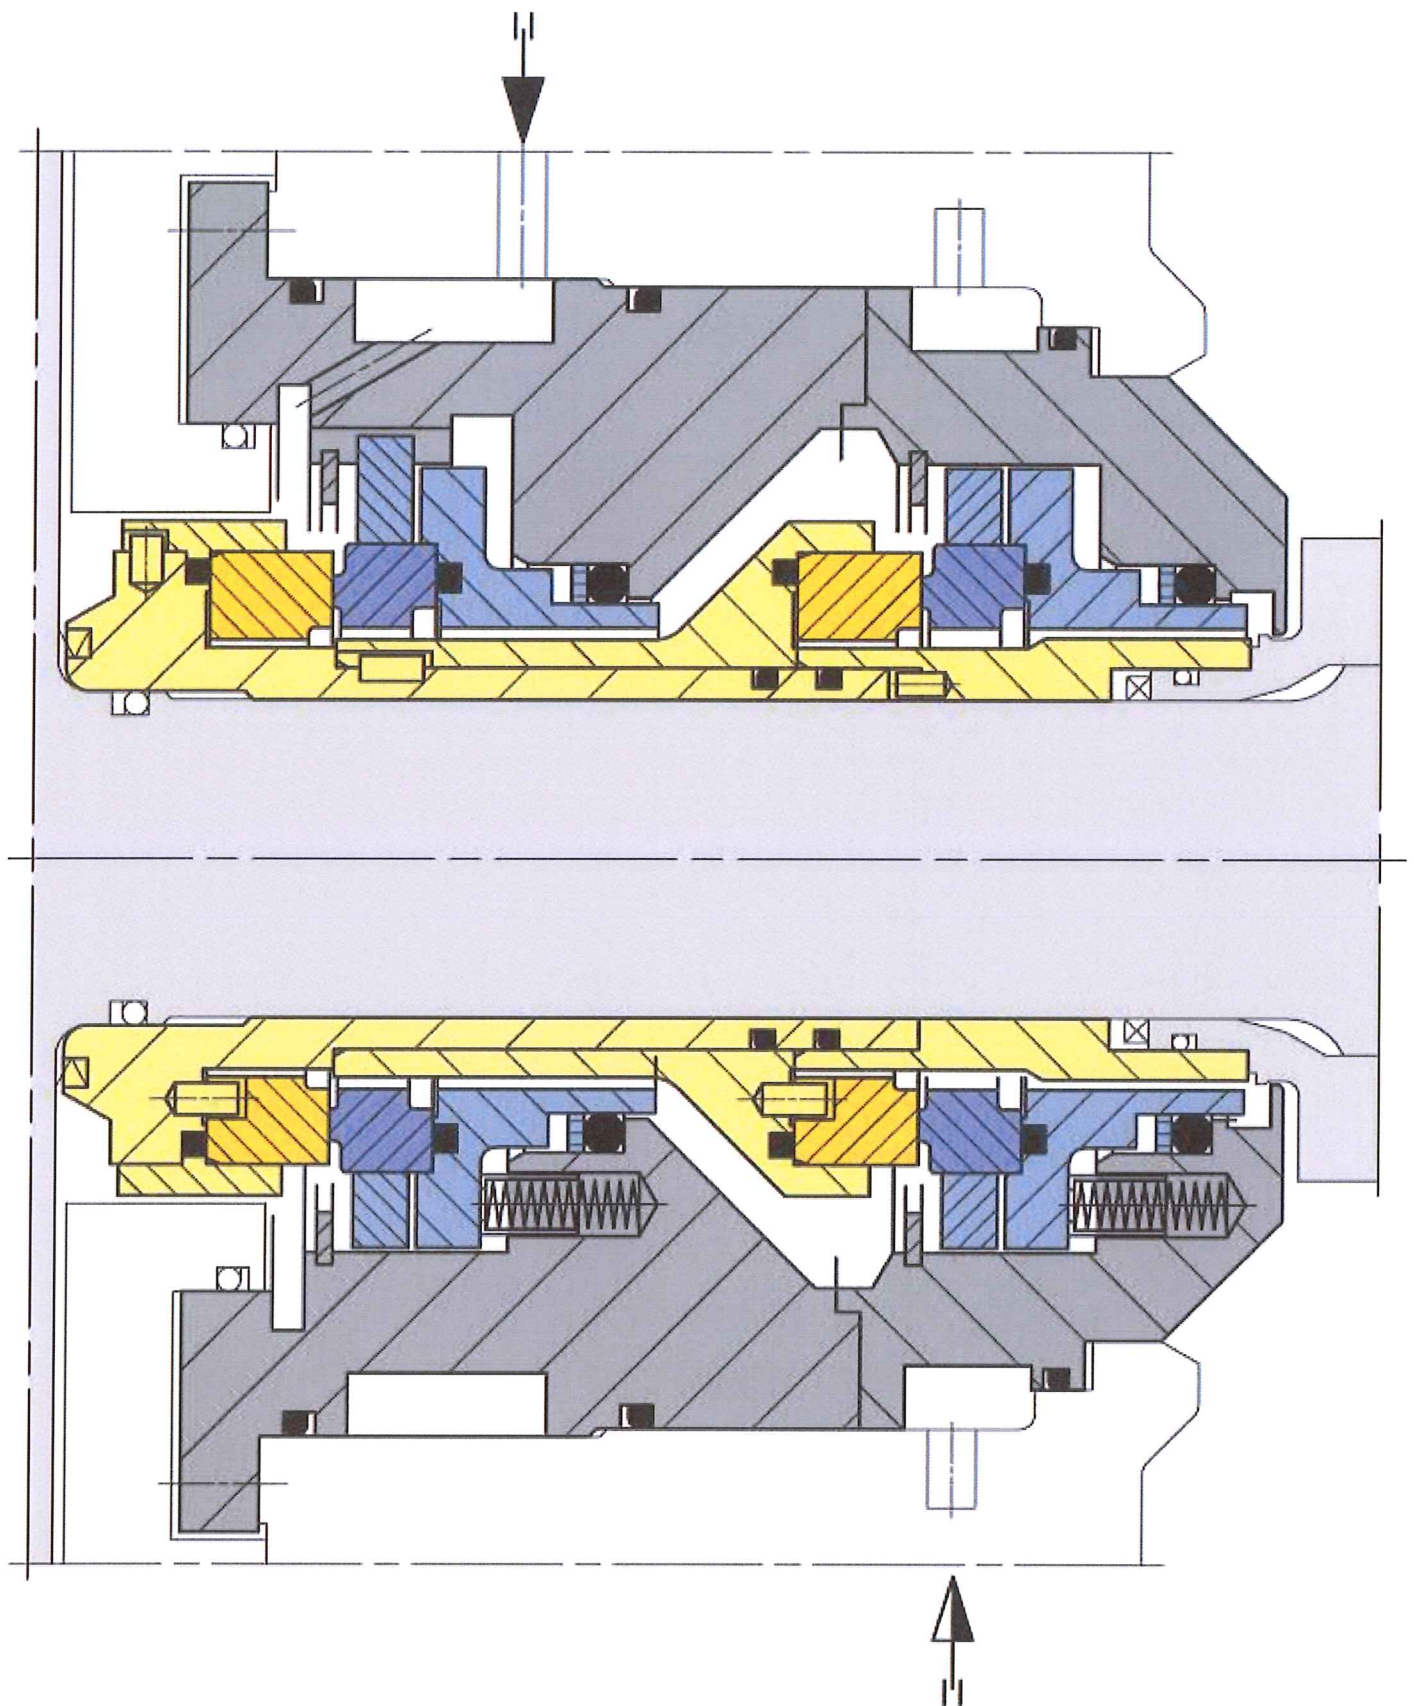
Double seal in tandem arrangement. The yellow parts are rotating, blue are stationary, and gray shows the shaft and housing.
